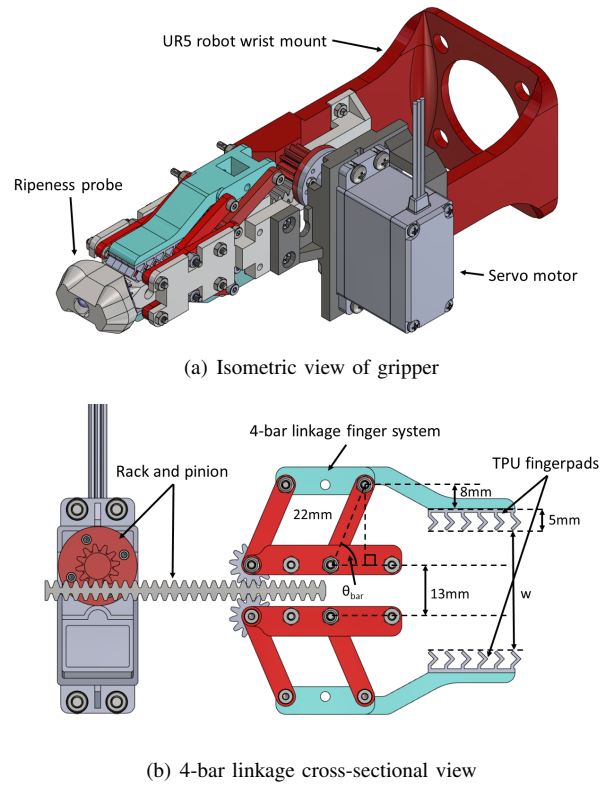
Isometric view and cross-sectional view of the developed gripper with dimensions labeled.
